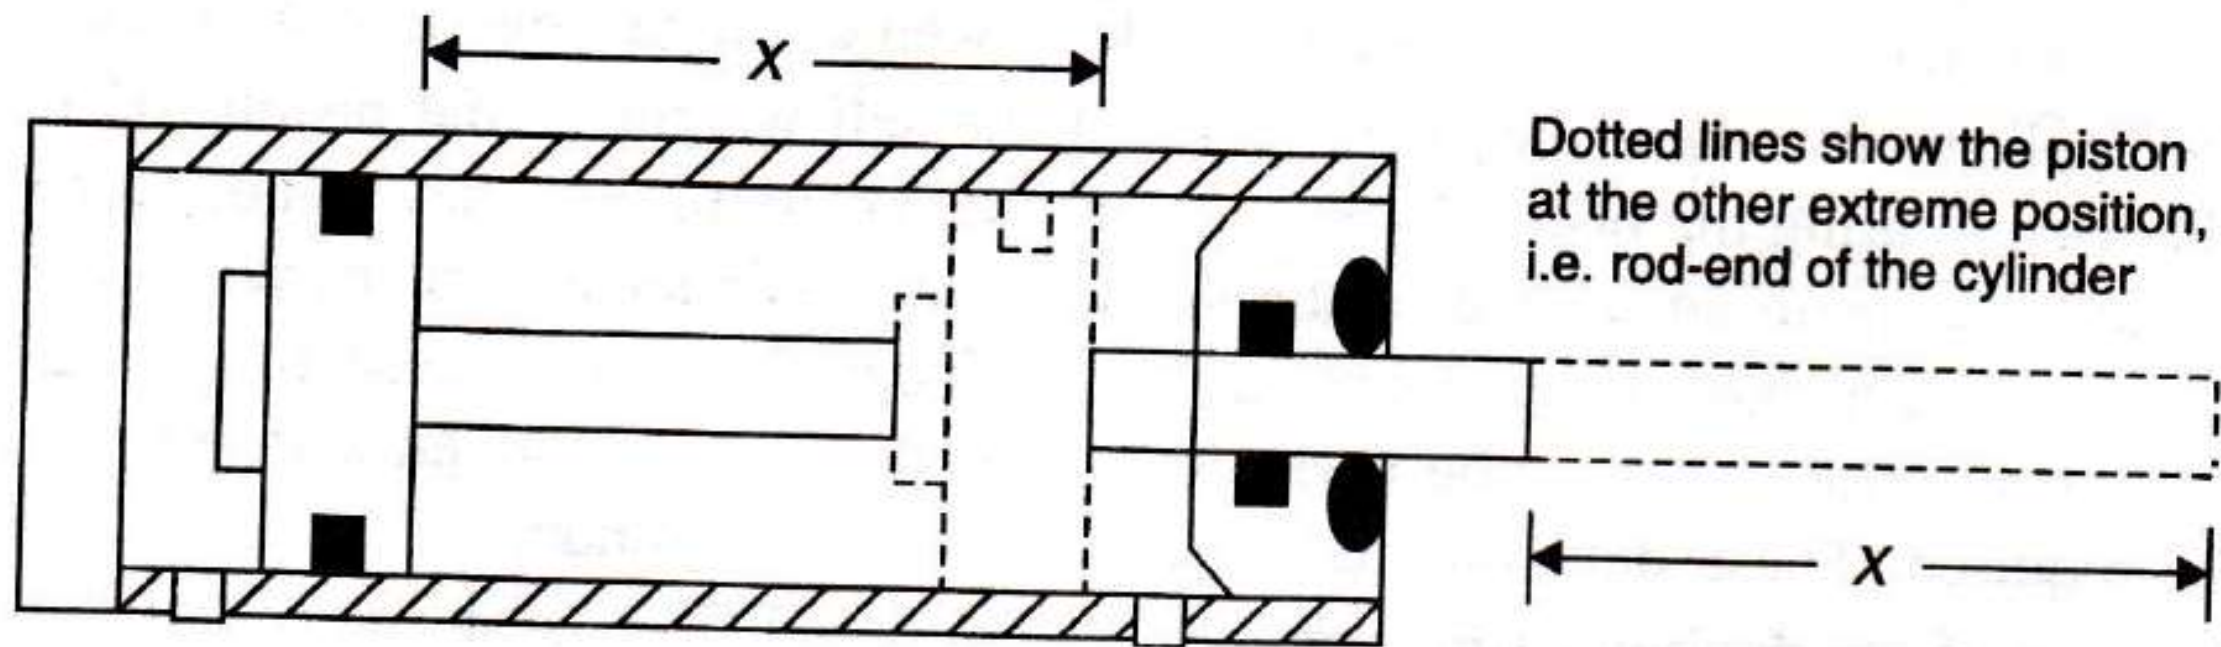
Double-acting, welded-type cylinder.
